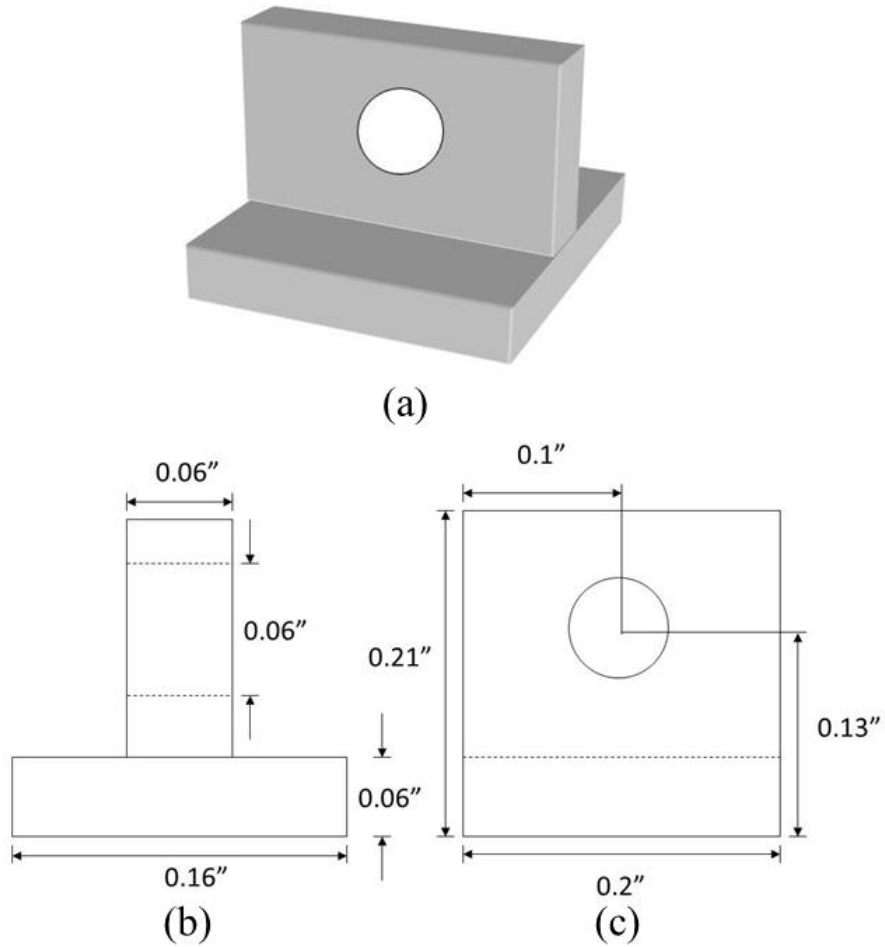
(a) Schematic diagram of a DCB grip, (b) side view of the DCB grip with specific dimensions, and (c) front view of the DCB grip with specific dimensions.
